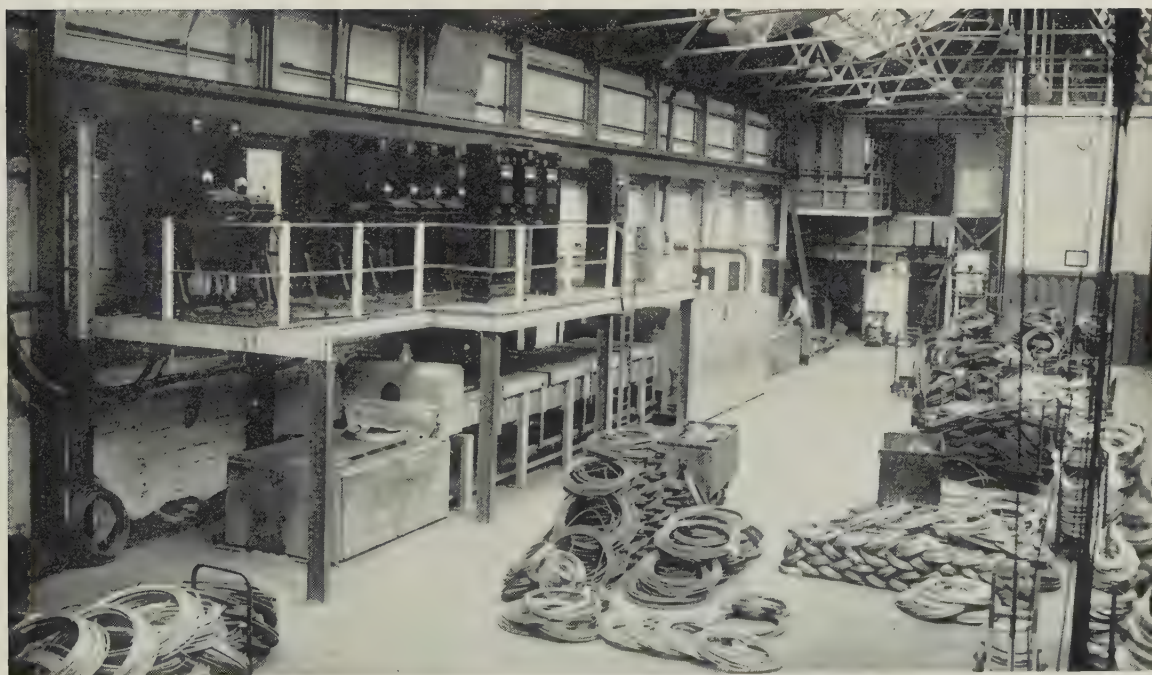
Belt-Conveyor Furnace for Clean Annealing.
